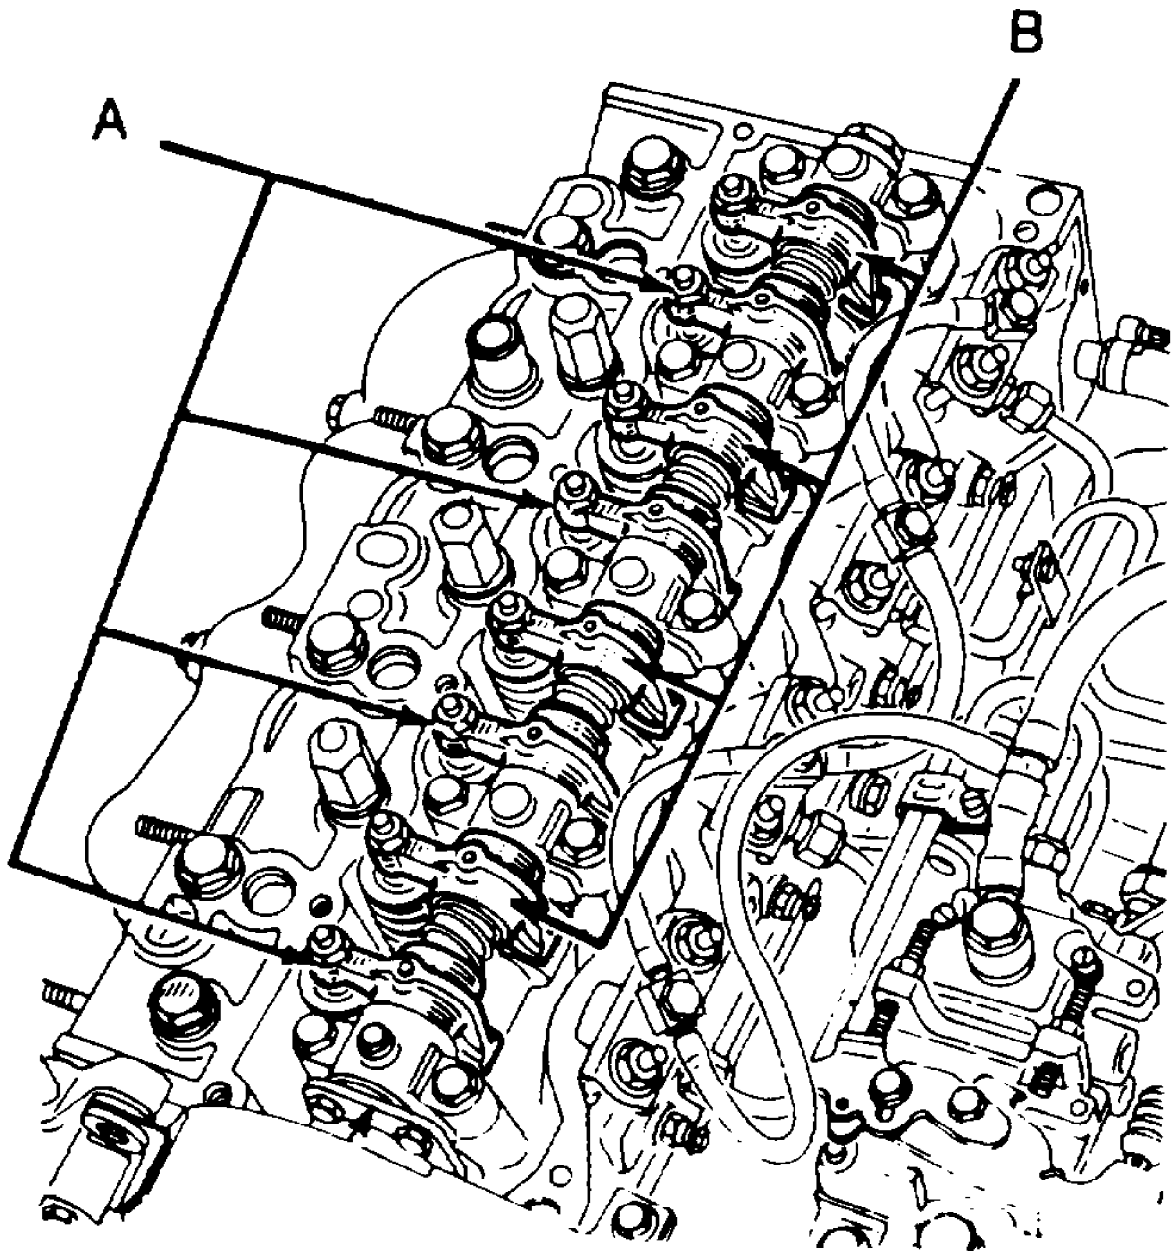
Rocker Arm Shaft Assembly (Oil Filter Location)
